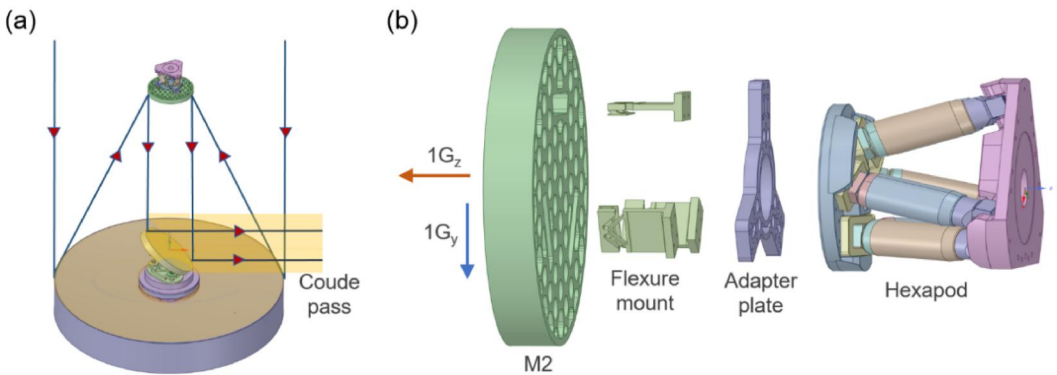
Configurations for optical path and secondary mirror (M2) assembly. (a) Beam path of optical tube assembly. M1 and M2 collimates the beam and M3 transfers it to coudé pass. (b). Configuration of the M2 assembly. It consists of the M2, flexure mount, adapter plate and hexapod. The red and blue arrows represent the direction of gravity in the vertical and horizontal directions, respectively.
